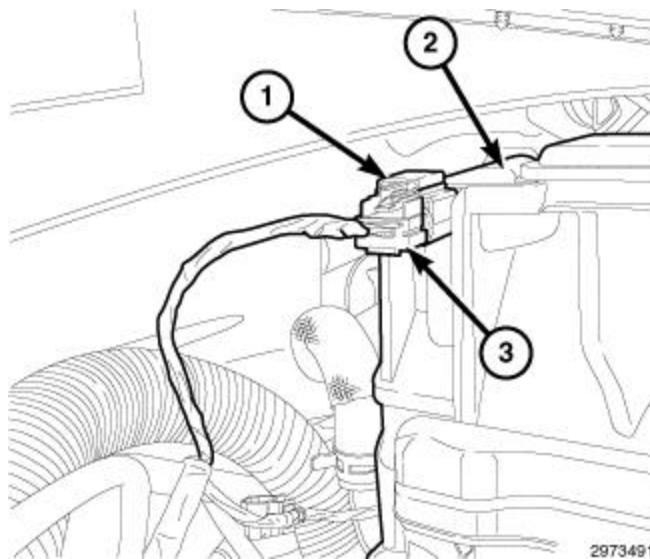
Manifold Absolute Pressure (MAP) Sensor, Intake Manifold & Electrical Connector
